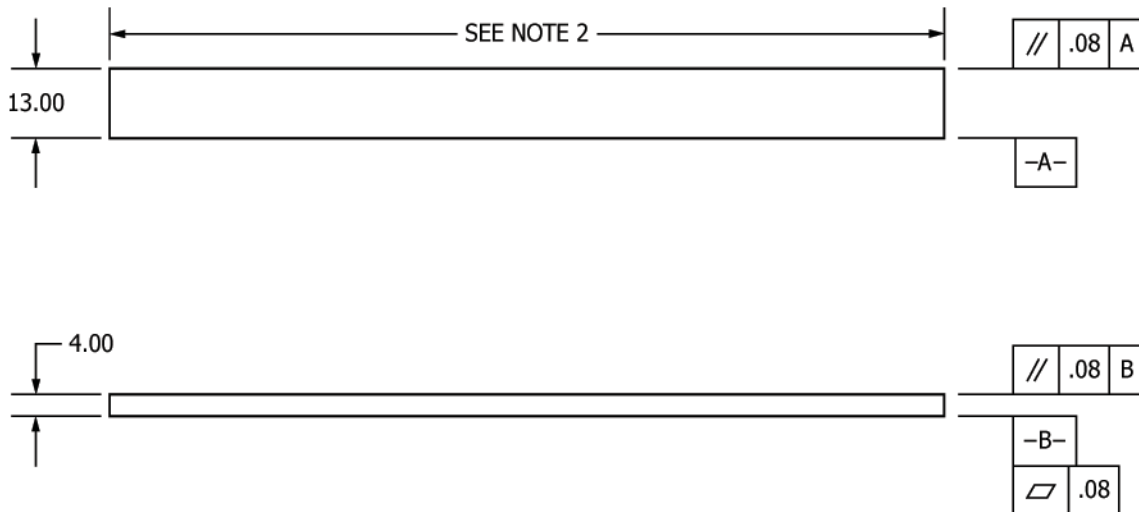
Standard Flexural Test Specimen Drawing (SI)
